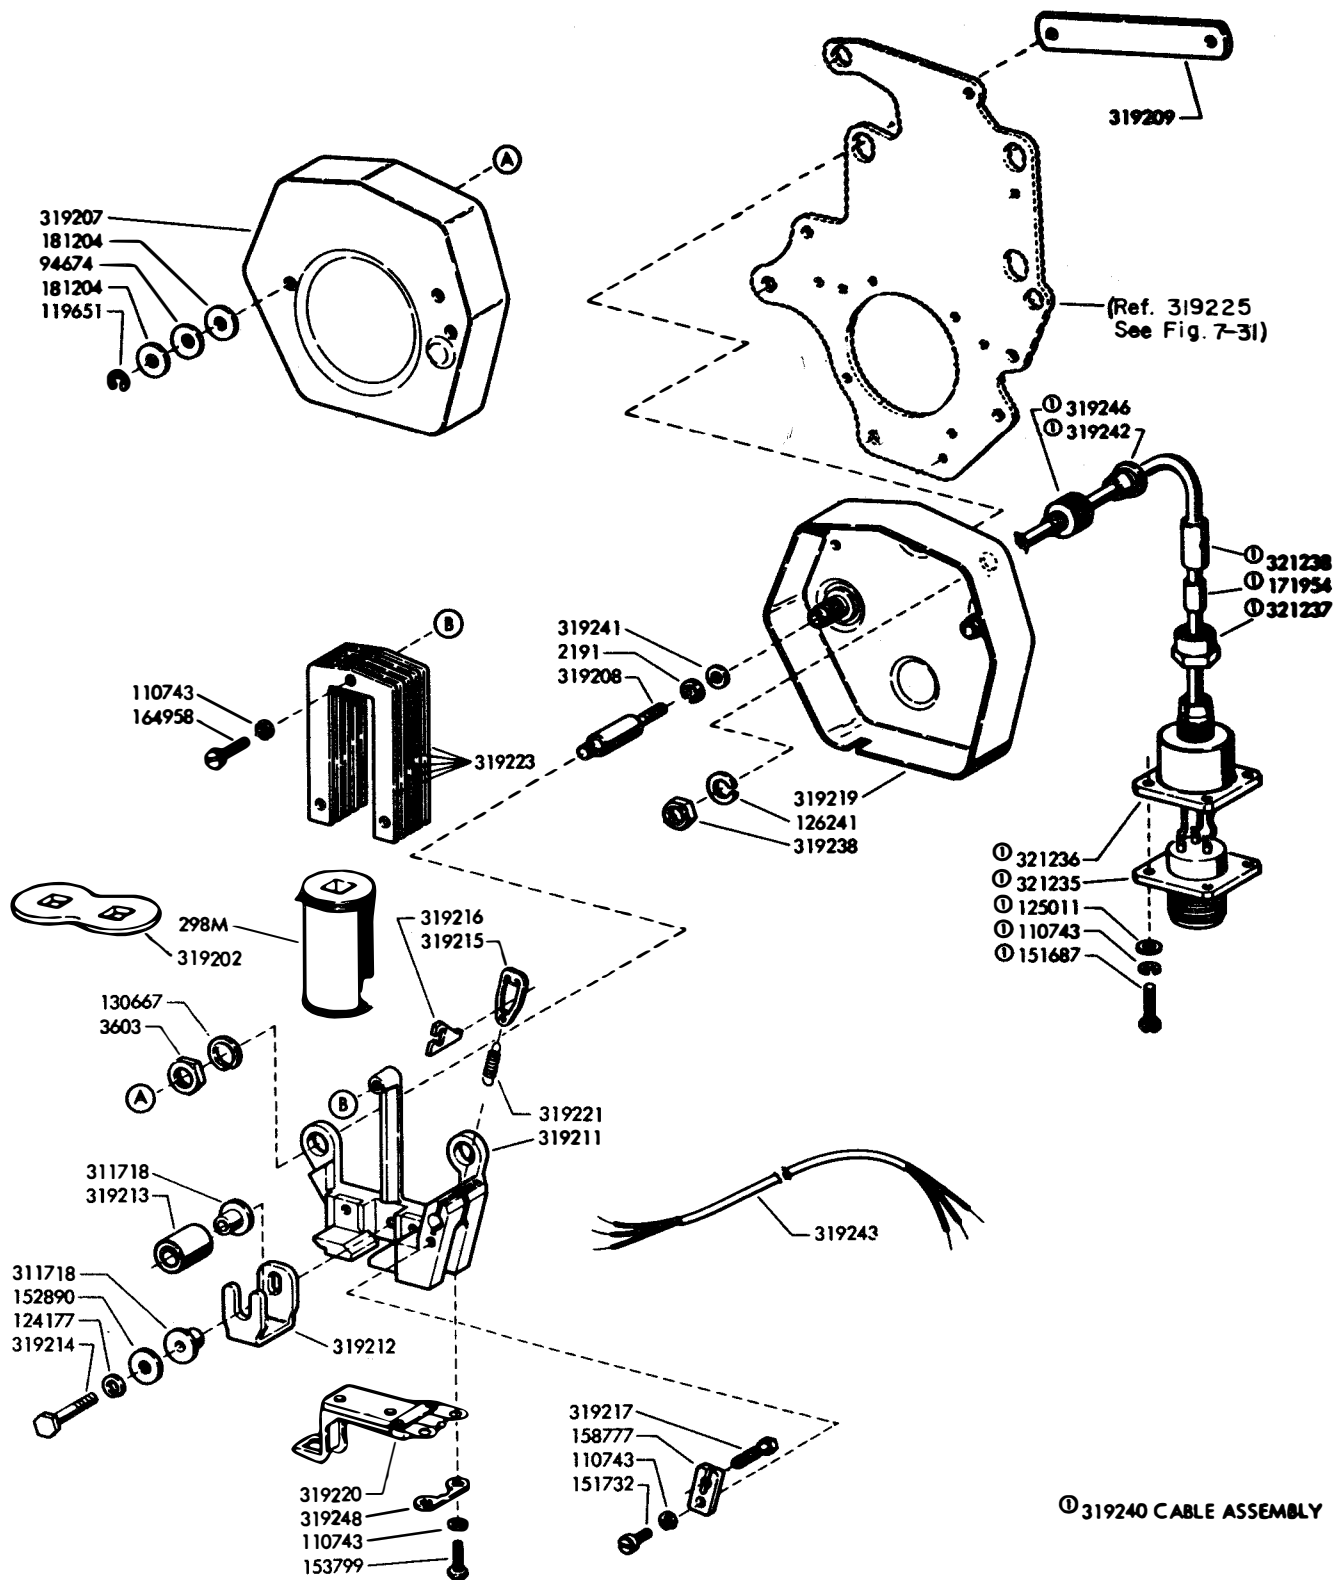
Selector Assemblies 319204 and 327383 - Used on Low-Level Sets (Sheet 2 of 2)
